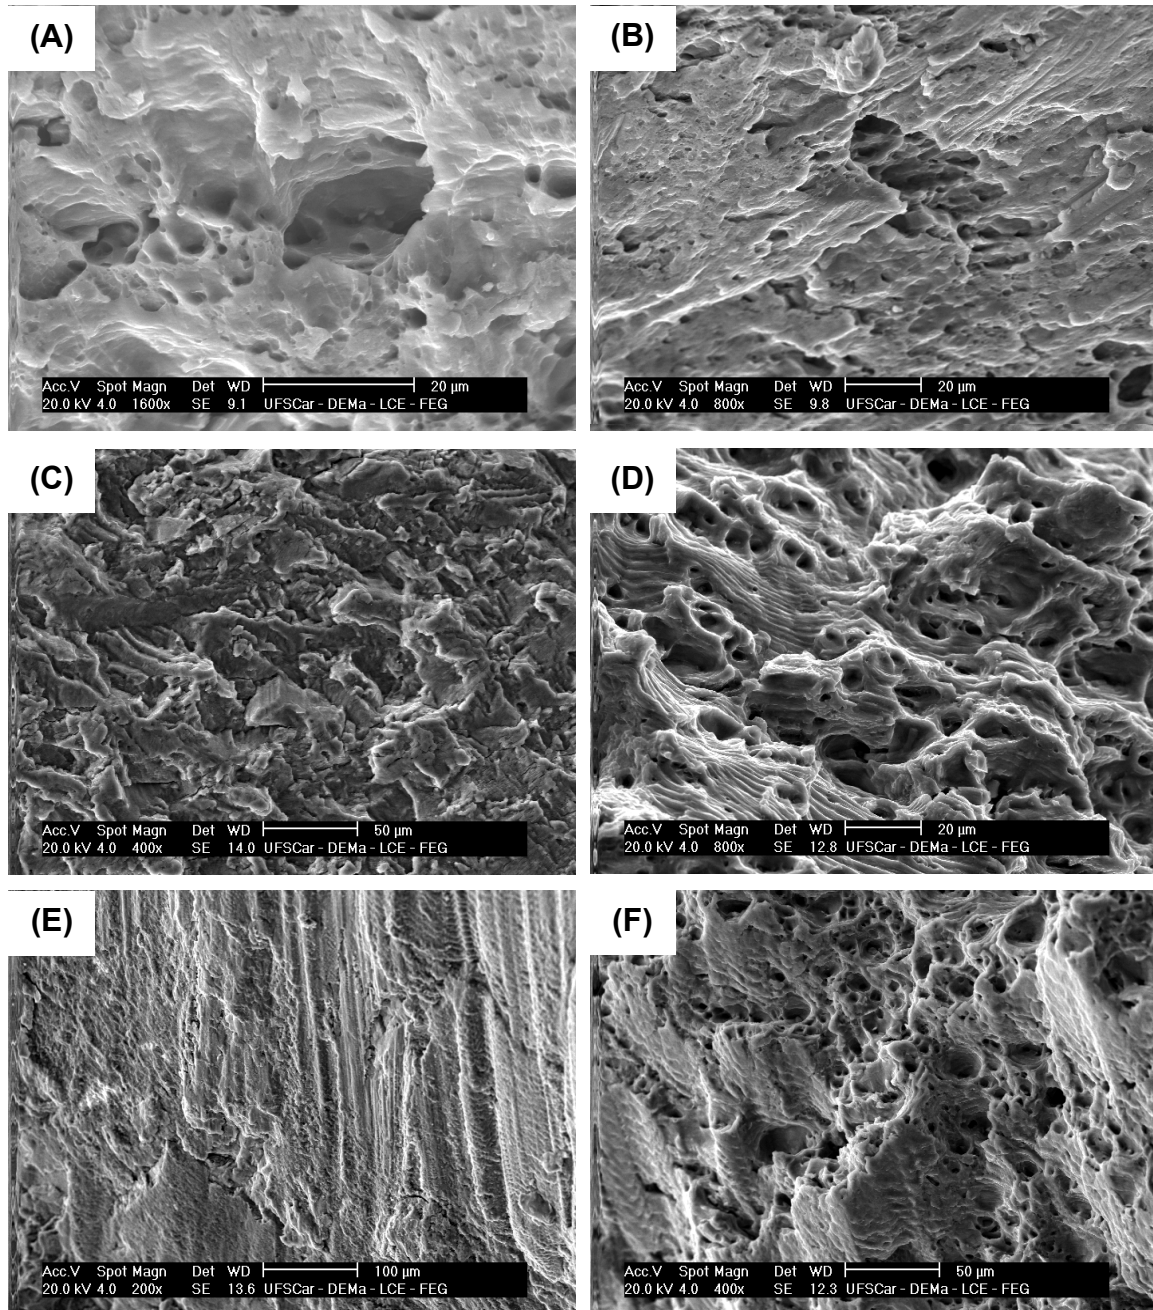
Fracture surface investigation of the pull-out failure mode for low-cycle loading condition: (A) dimples and (B) cleavage and dimples indicating ductile fracture in the final fracture area; (C) fatigue striations in the center area; (D) dimples, (E) cleavage and (F) dimples in the deformed region.
